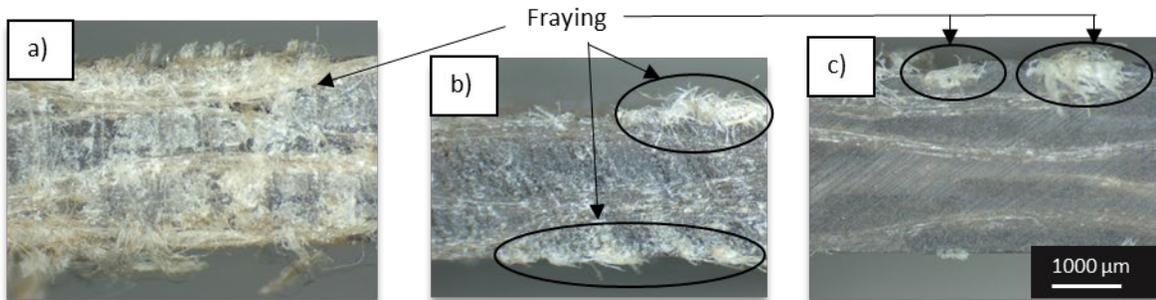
Examples of mechanical cutting of FFRP with different tools: a) hand saw, b) milling machine, c) wet saw
